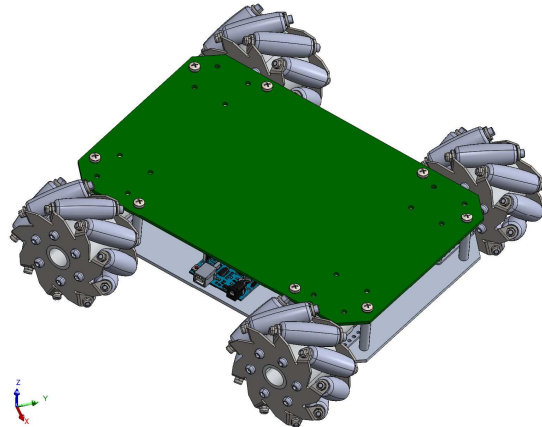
3D CAD model of Mecanum wheeled mobile robot
